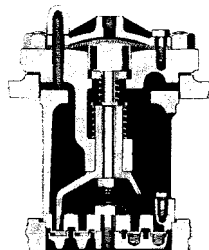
Suction valve unloader in which fingers hold the valve open until compressed air pressure is reduced.
